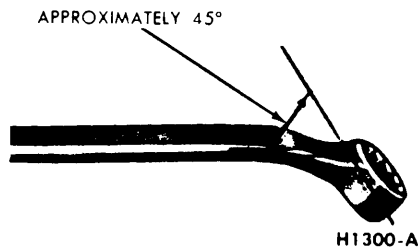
Wrench for Bleeding Brake Hydraulic System
